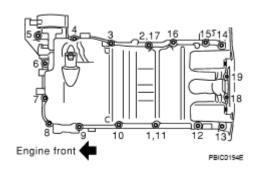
Identifying Oil Pan Mounting Bolts Tightening Sequence
